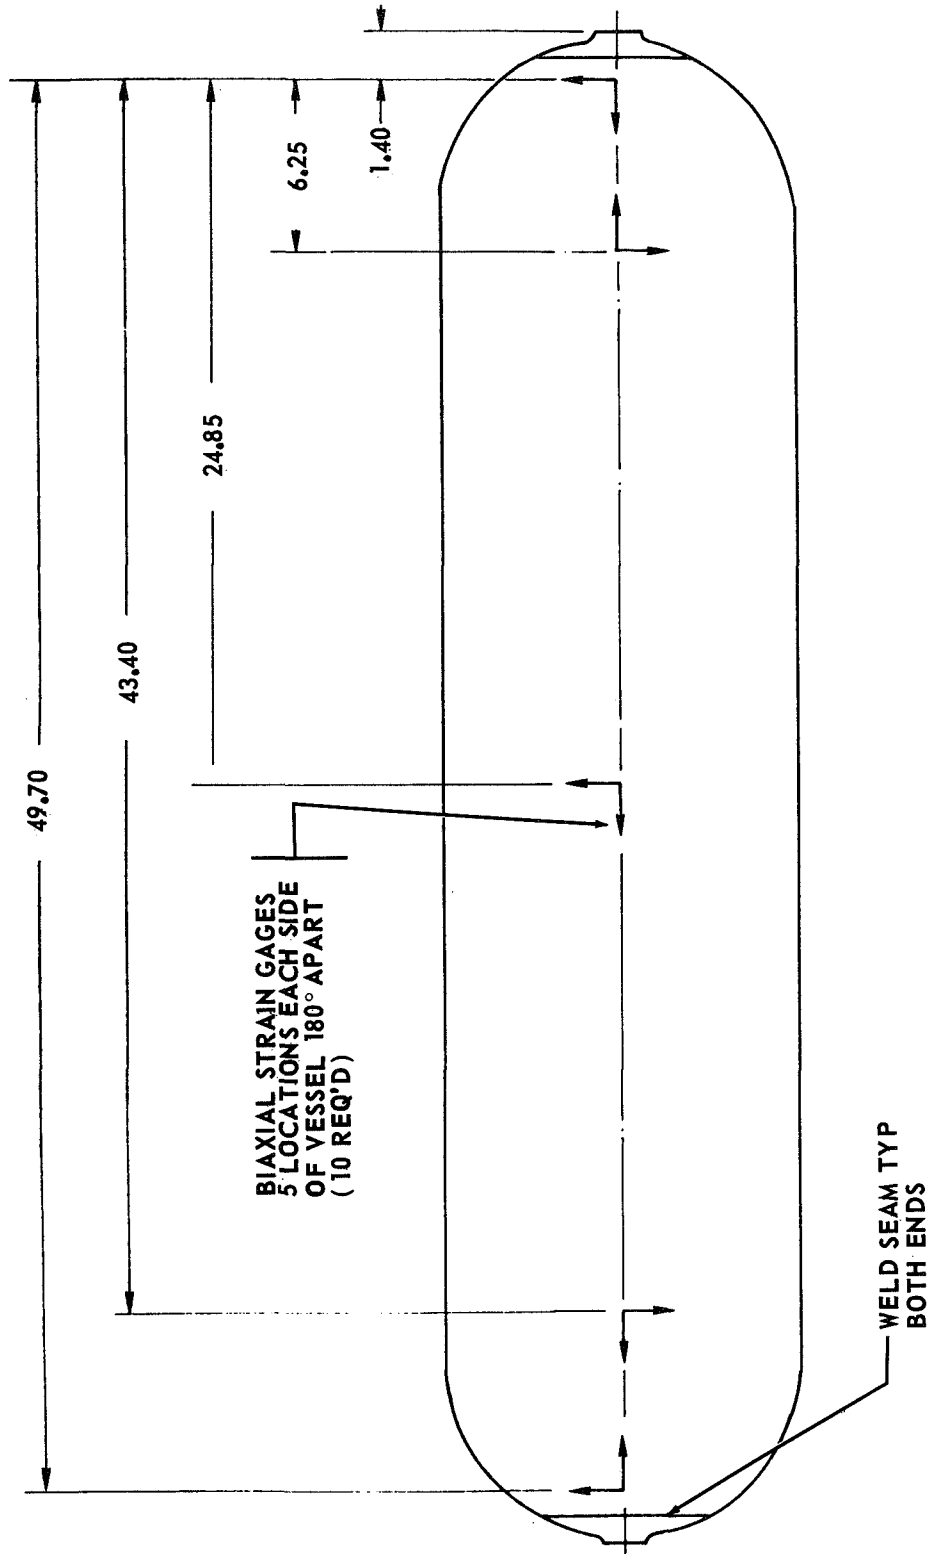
Strain gage locations for integral head pressure vessel S/N US-5.
